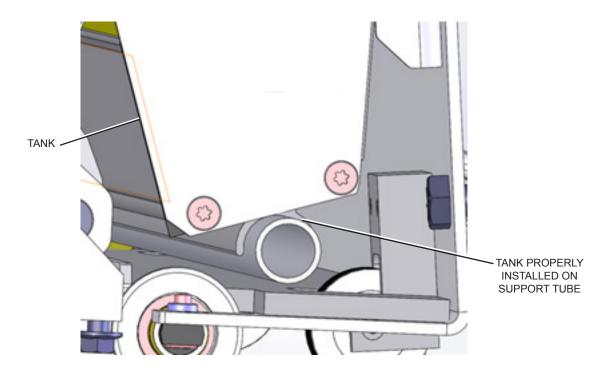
Conditioner Tank in its Proper Position on Support Tube
